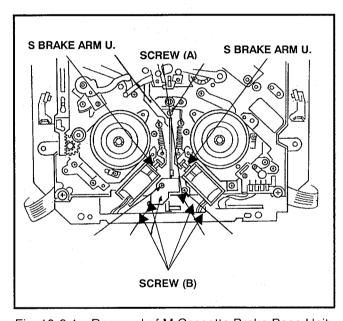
Removal of M Cassette Brake Base Unit
